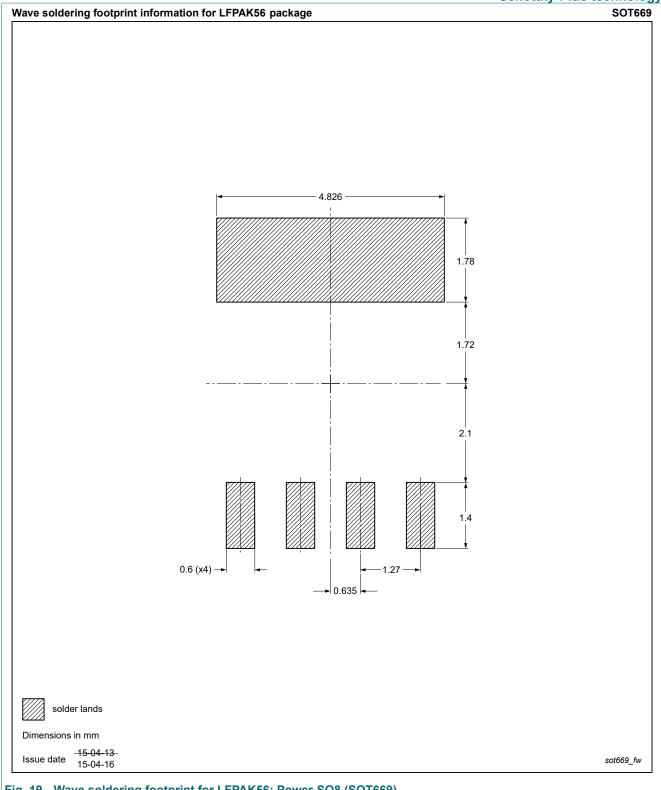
Wave soldering footprint for LFPAK56; Power-SO8 (SOT669)
